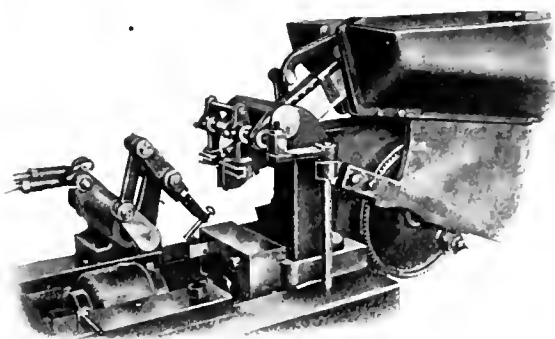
Feeding Mechanism of Bolt Head Trimmer.
